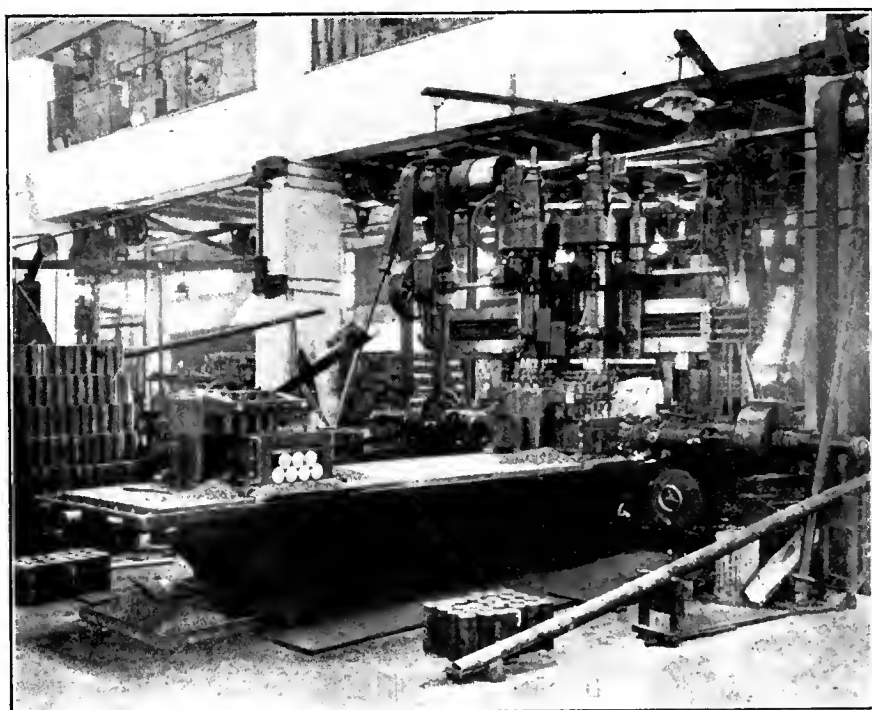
FIXTURES WHICH INCREASED OUTPUT OF MACHINE 75 PER CENT.
